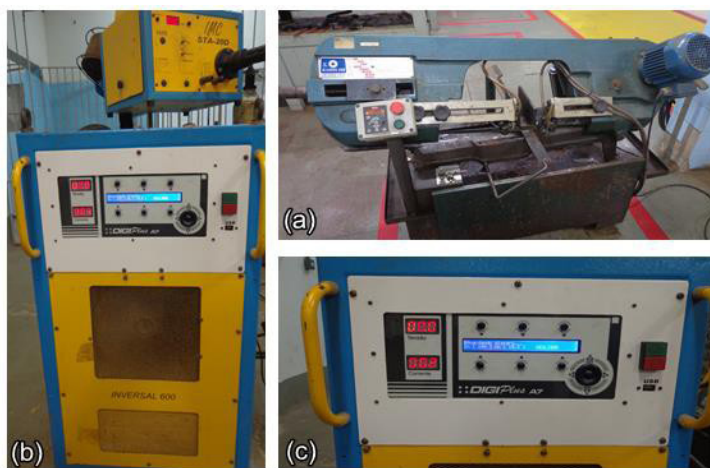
(a) Process of cutting welding specimens. (b) Multi-process machine used during the welding process. (c) IMC Inversal 600 Human-Machine Interface.
